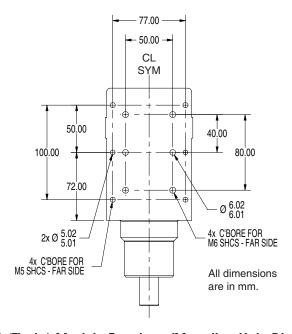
LT1 (Theta) Module Envelope/Mounting Hole Dimensions (Bottom View)
